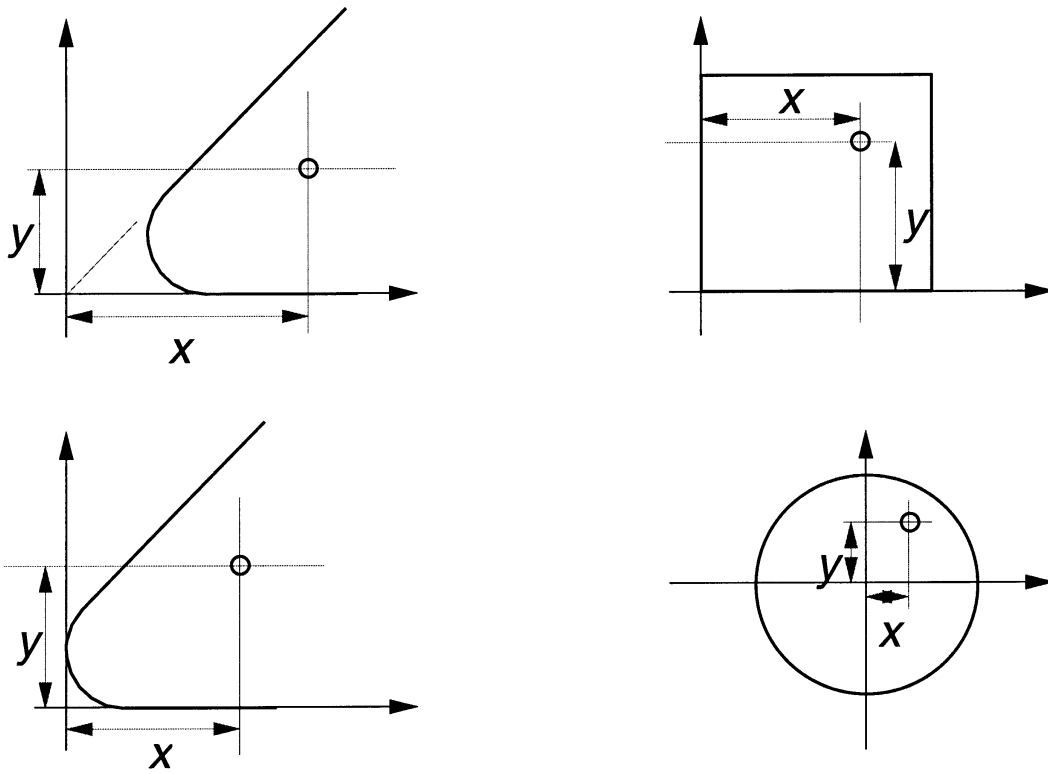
Examples of the positioning of holes relative to the datum point
